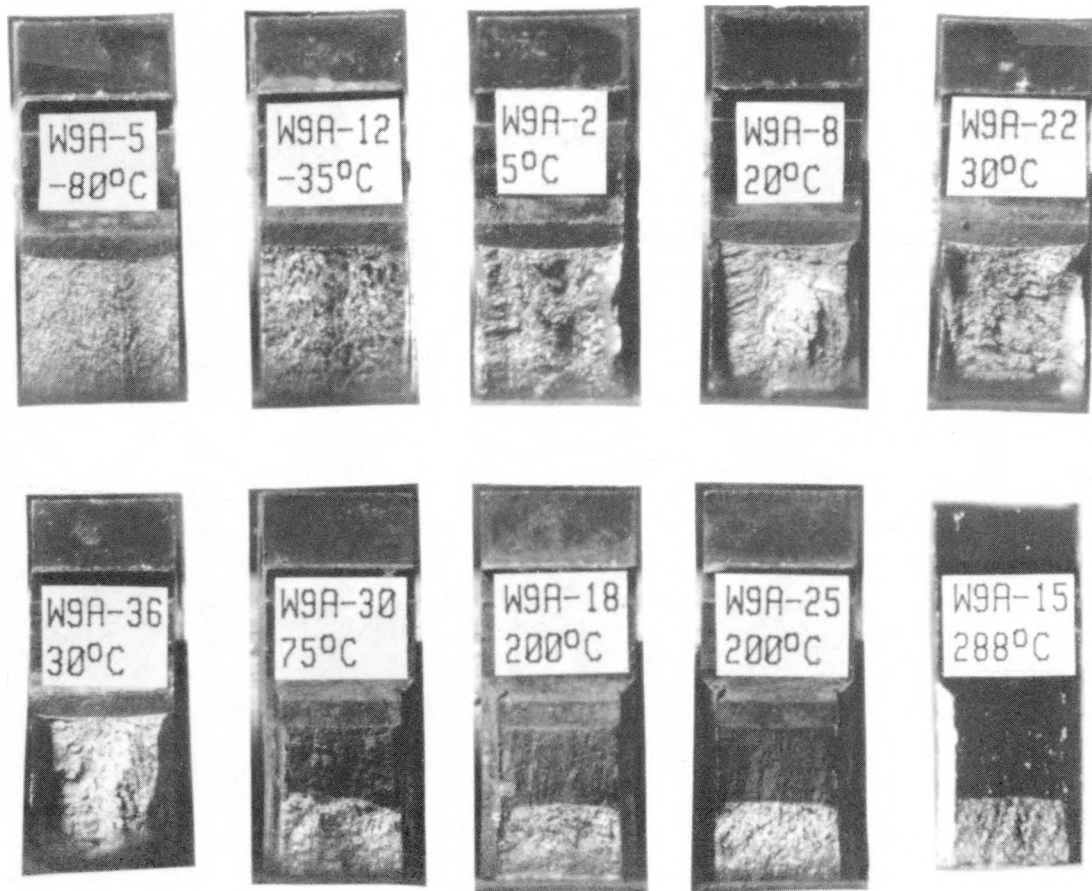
Fracture surfaces for the Linde 0091 weld (W9A), in the I condition to a fluence of $1.5 \times 10^{19} \text{ n/cm}^2$.
